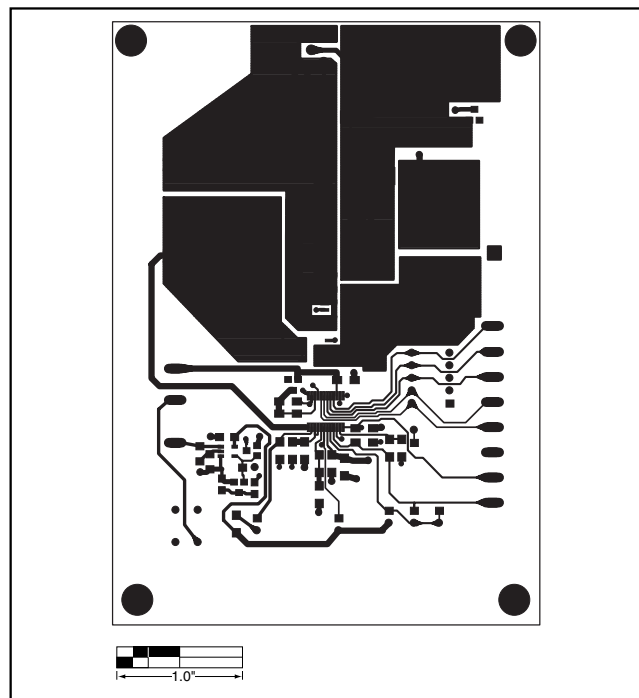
MAX1711 Voltage Positioning EV Kit PC Board Layout—Component Side
